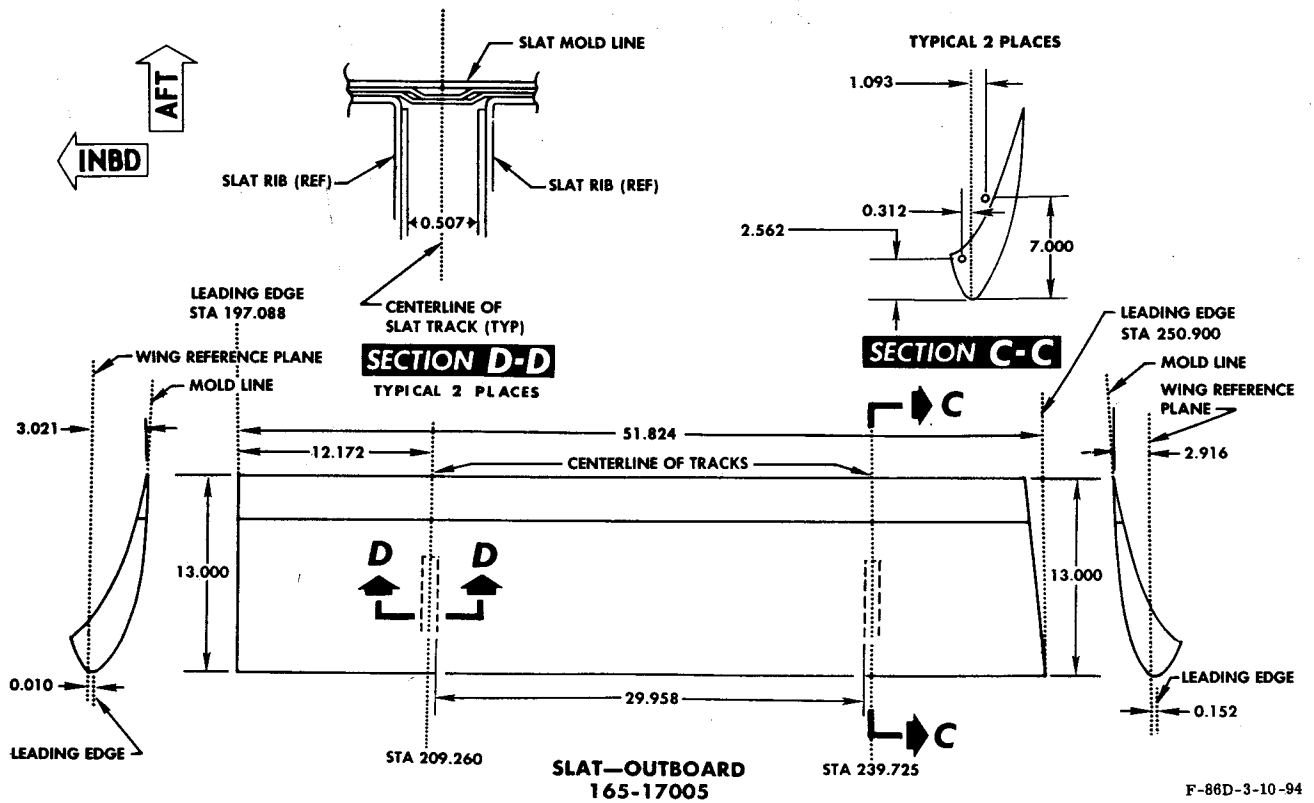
Holding Fixture Dimensions—Slats—Outboard and Outboard Intermediate (Sheet 2 of 2)
